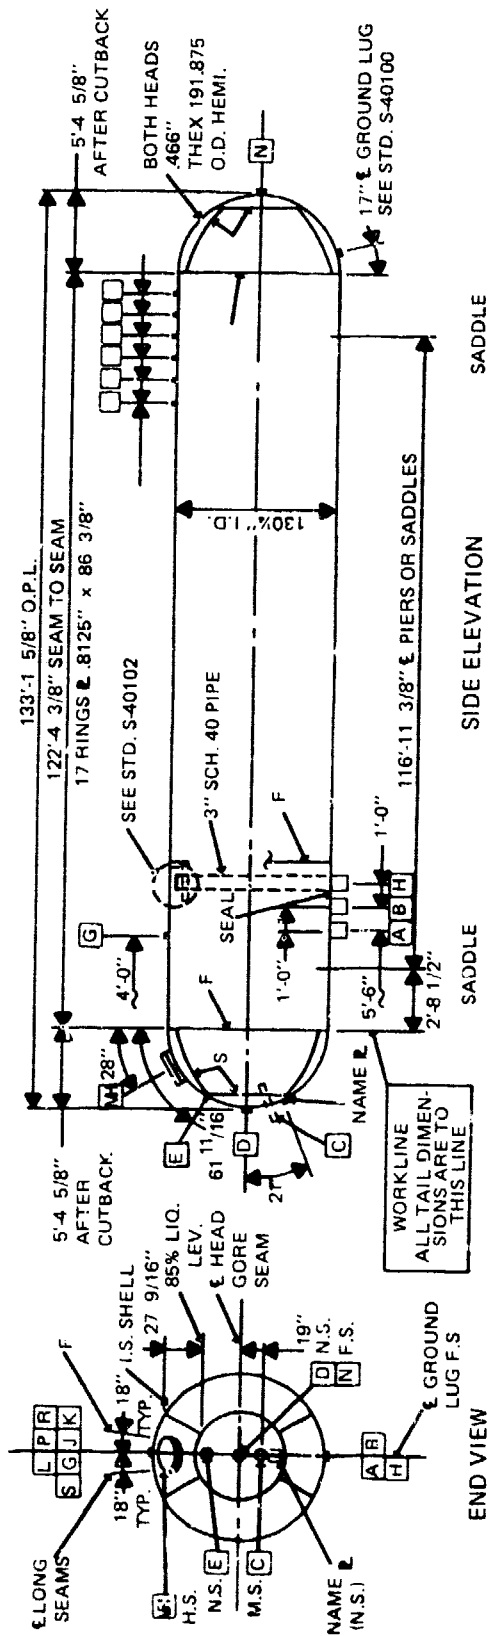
6 – ELEVATION VIEWS OF TYPICAL STEEL HORIZONTAL PRESSURIZED PROPANE "BULLET" TANK MANUFACTURED BY TRINITY INDUSTRIES.
